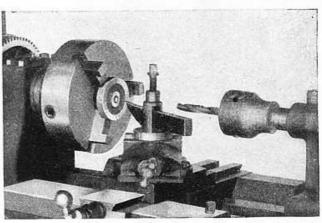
Drilling and Facing a Gear Blank Held in a Three Jaw Chuck
